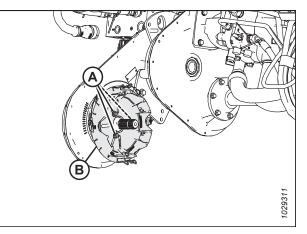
Completion Gearbox Chain Tensioner Cover
